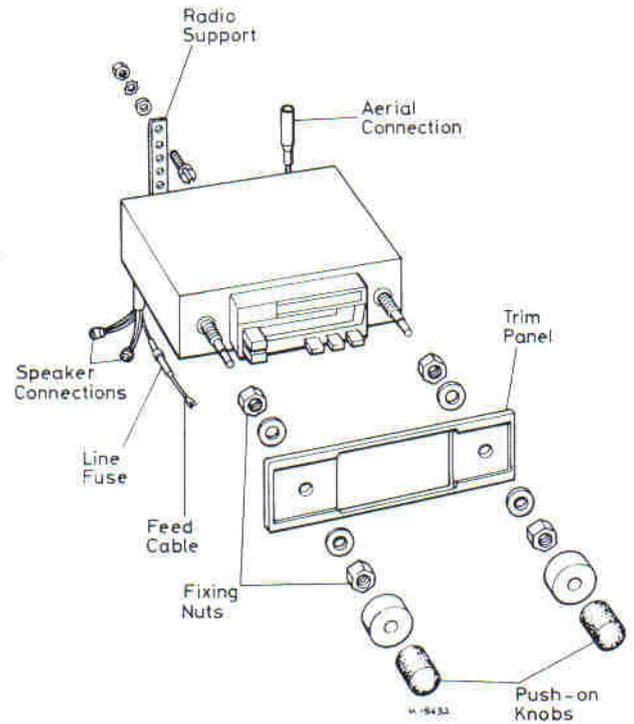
Mounting component details for radio/cassette unit (Sec 42)
